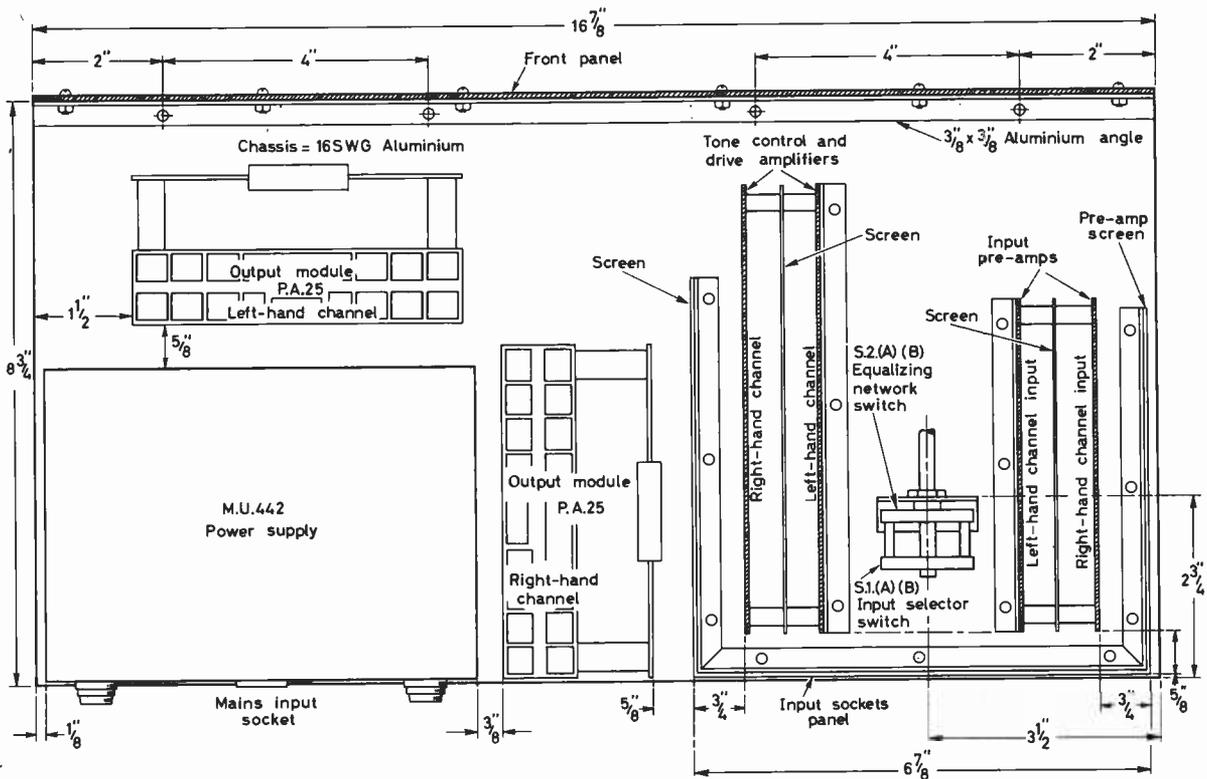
Layout of units on chassis. Chassis dimensions must be adhered to if specified cabinet is to be used.
